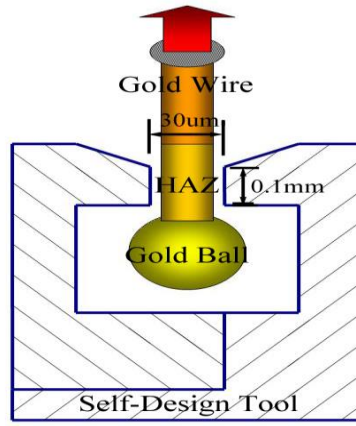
Self-designed tensile test fixtures for the neck (HAZ)
